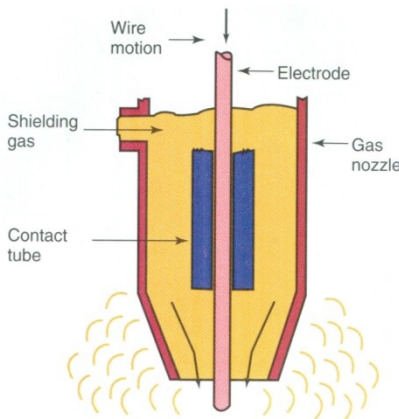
Schematic view of gas metal arc welding gas nozzle and electrode (Althouse, 2004)
